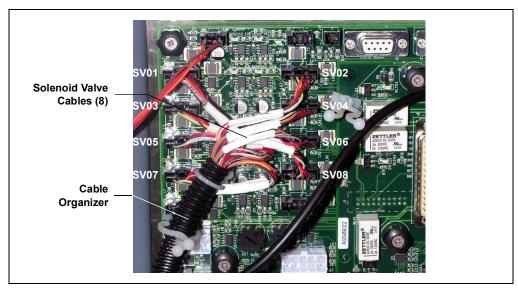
Main SP Electronics Board: Solenoid Valve Cable Connections
